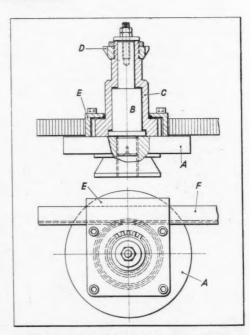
Sectional and plan views of a special toolpost for use on a standard lathe. A disc-type toothed cutter is employed, and is rolled in "mesh" with the work to produce annular grooves
